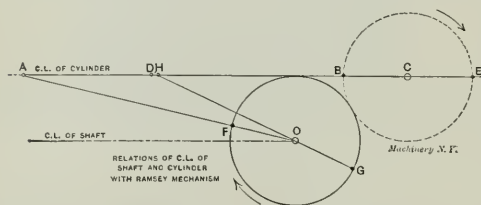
Novel Crank Arrangement for Internal Combustion Engines.
